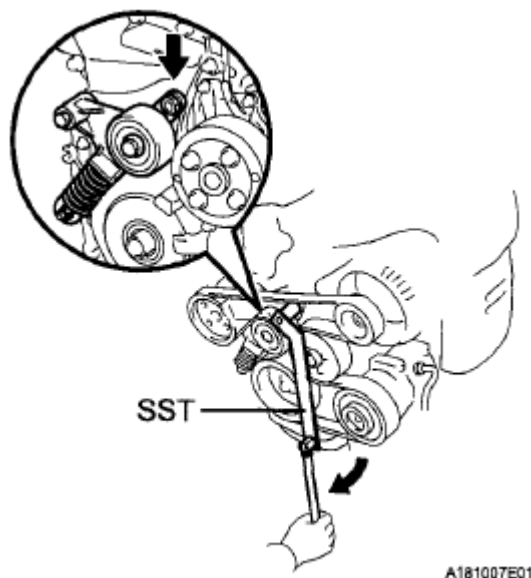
Turning V-Ribbed Belt Tensioner Clockwise
